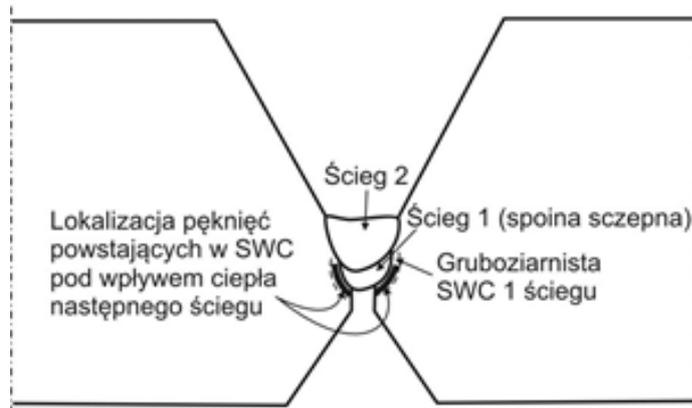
Mechanism of relaxation crack formation when making the first runs in the root on the tack weld
